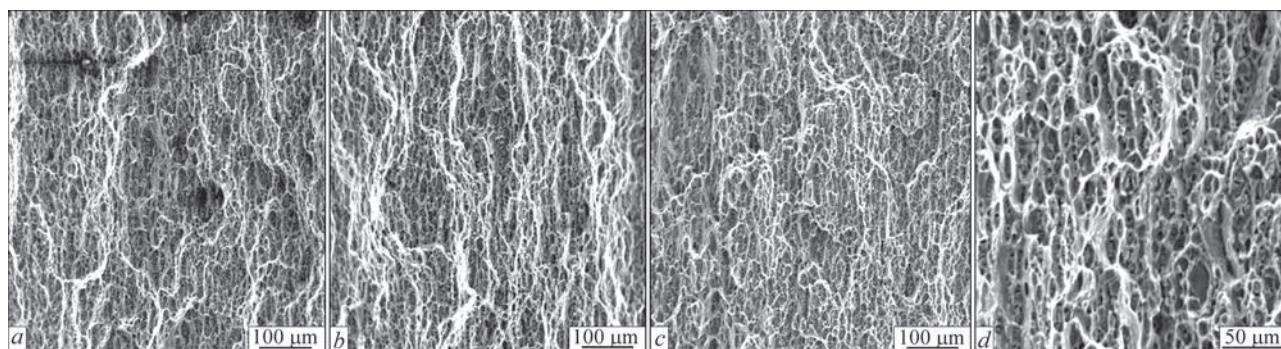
Panorama of fracture surface along the weld axis from technological convexity (a), medium regions (b, c) to the root (d) of a D16 alloy joint produced by consumable electrode welding, after mechanical testing ($\times 500$)
